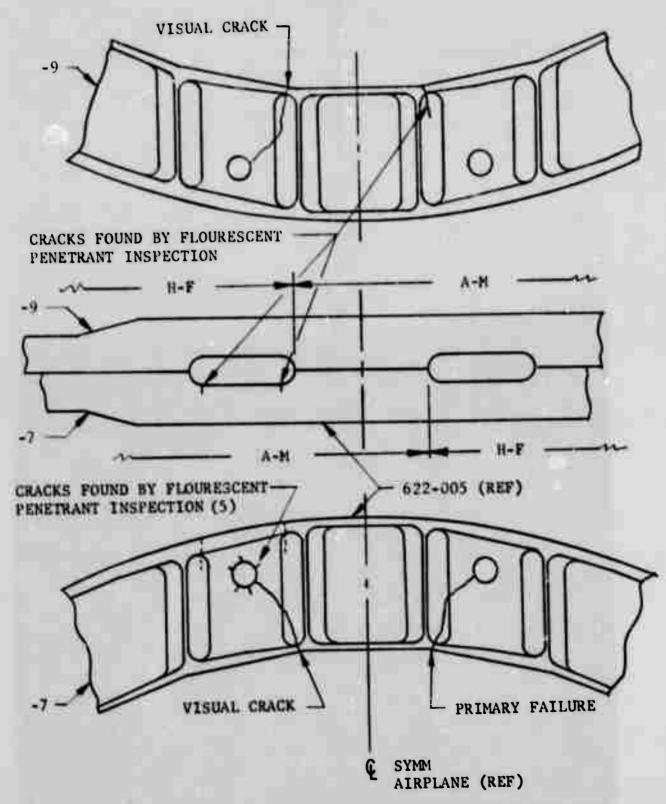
YF-16 FRAME PENETRANT INSPECTION CRACK DISCLOSURE
